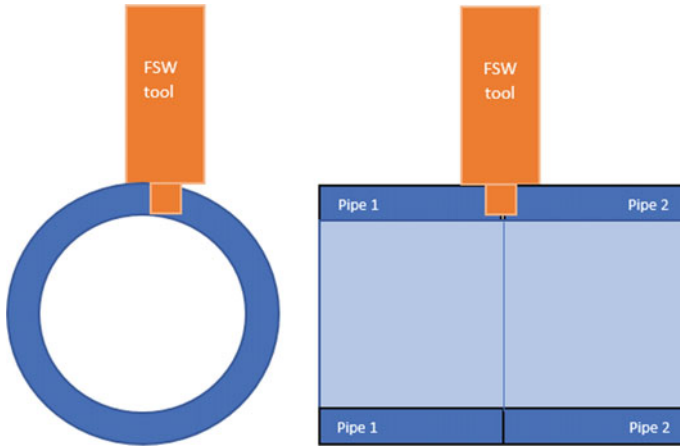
Cross-section view of FSW setup for pipe joining with no internal support
